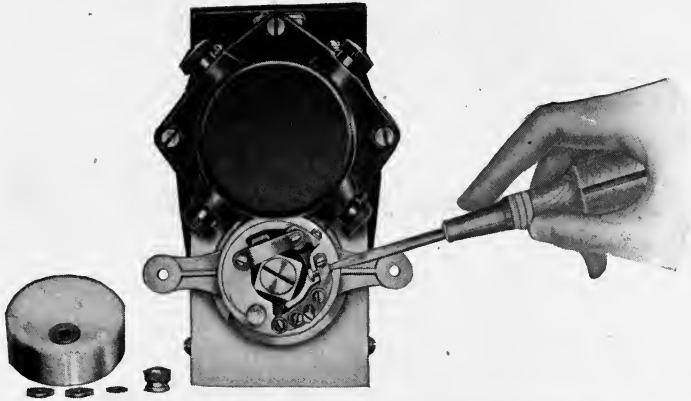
Adjusting contact joints, Dixie magneto odel 46.
